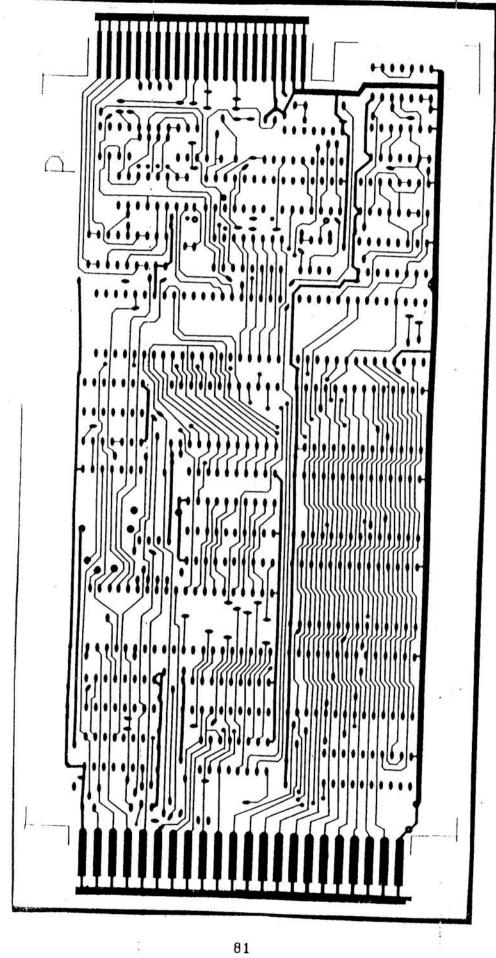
PCB LAYOUT OF SMPS AND BACKPLANE BUS
